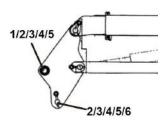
The telescopic boom is connected with the lower connecting piece
